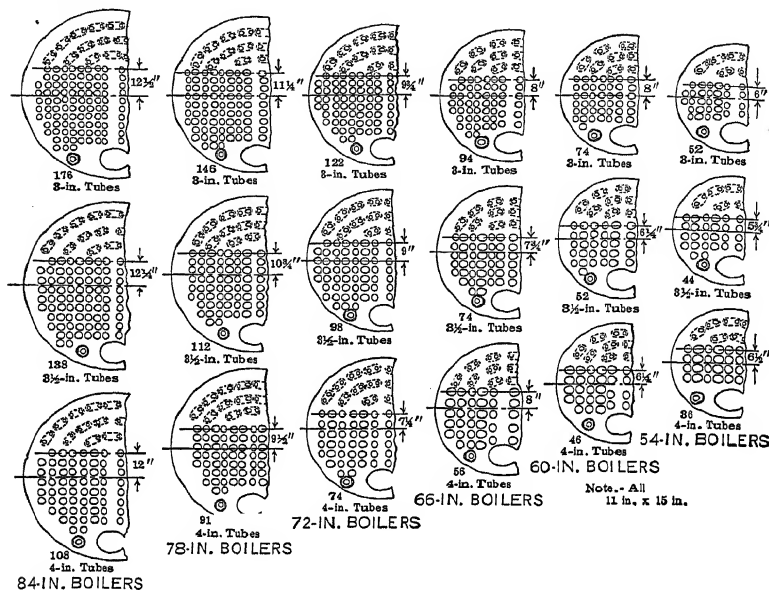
Arrangement of Tubes and Braces in Horizontal Return Tubular Boilers
